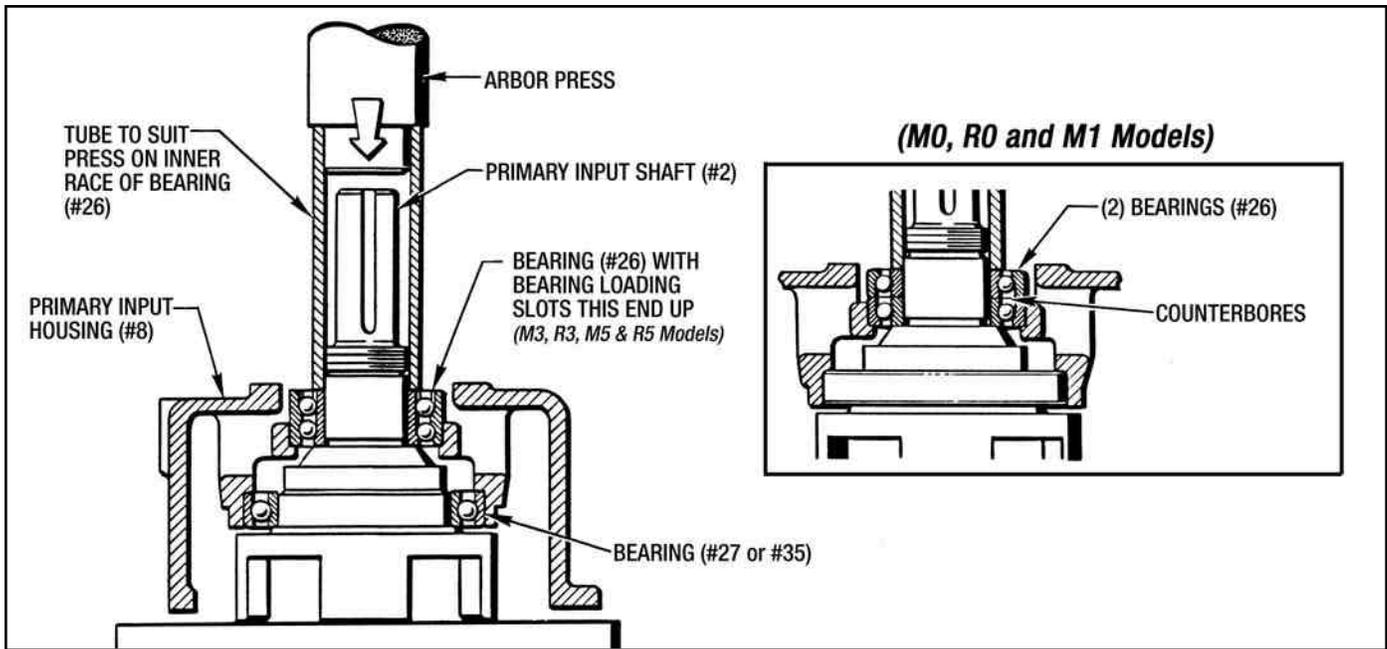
Pressing Bearing (#26) Into Primary Input Housing
